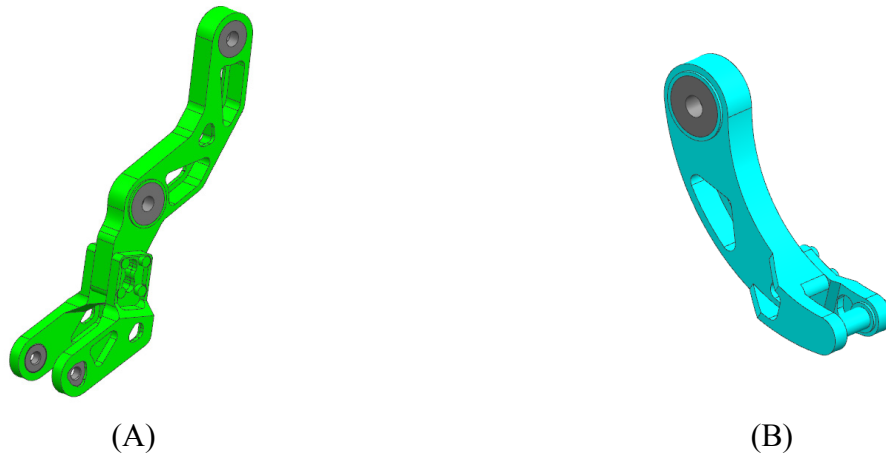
(A) Three bearing Hoeken's linkage piece and (B) two bearing linkage piece for the hip
